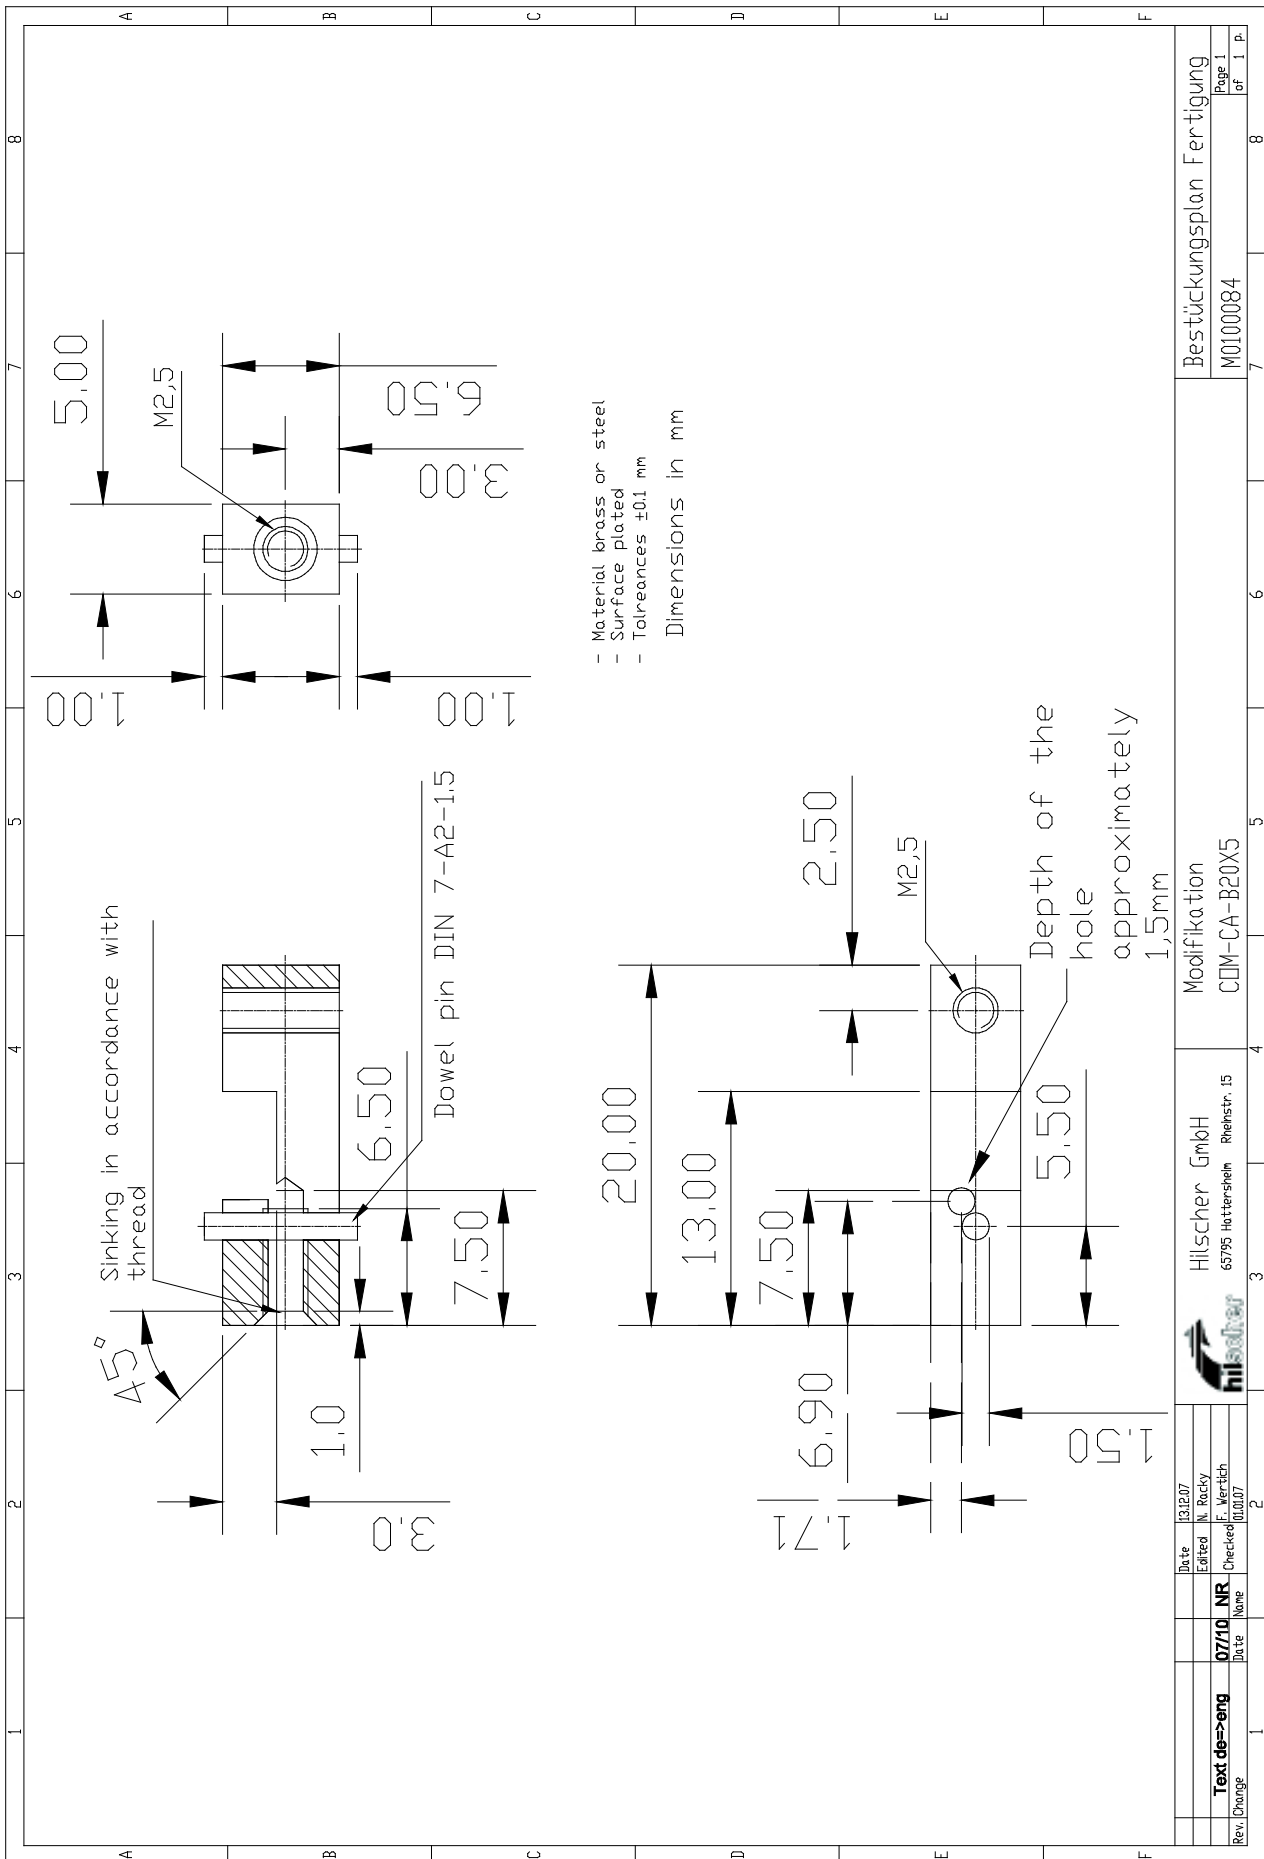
Mechanical dimension of Bolt COM-CA-B20X5
